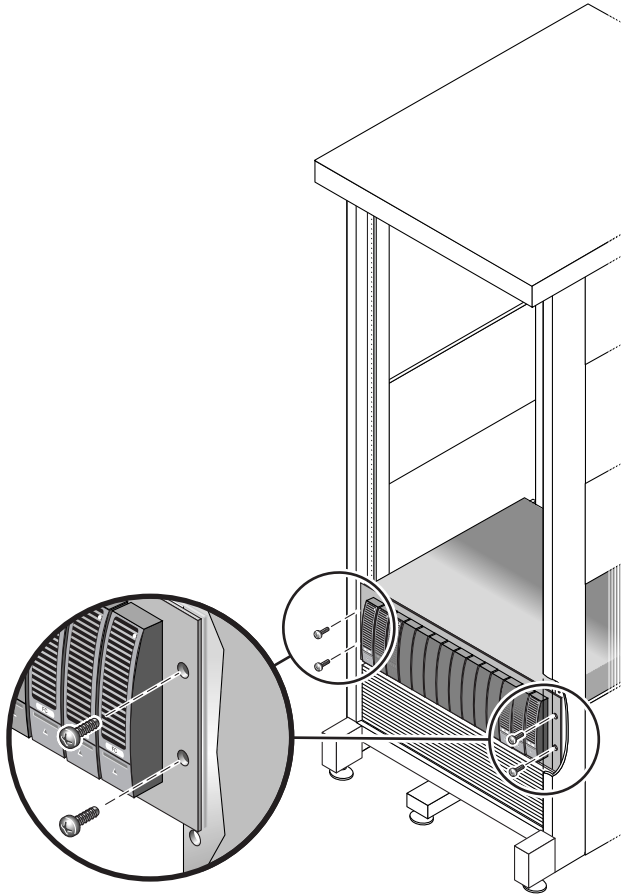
Securing the Enclosure to the Front of a Sun Rack 900/1000 Cabinet
